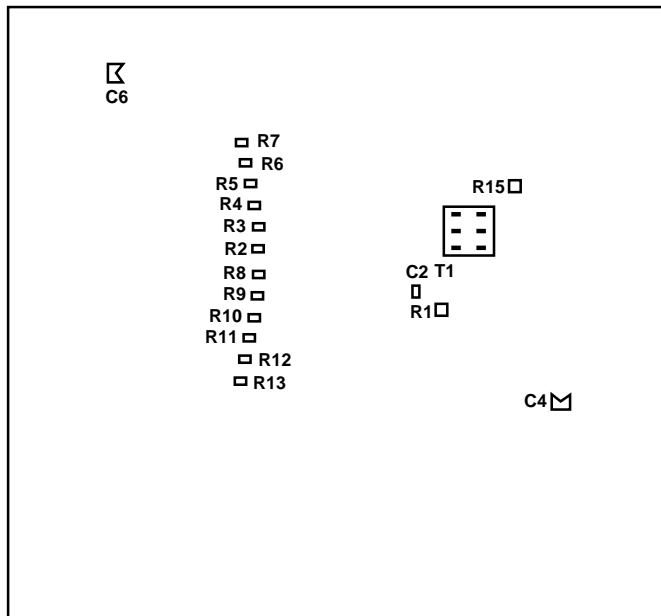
AD9042D/PCB Bottom Side Silk Screen
